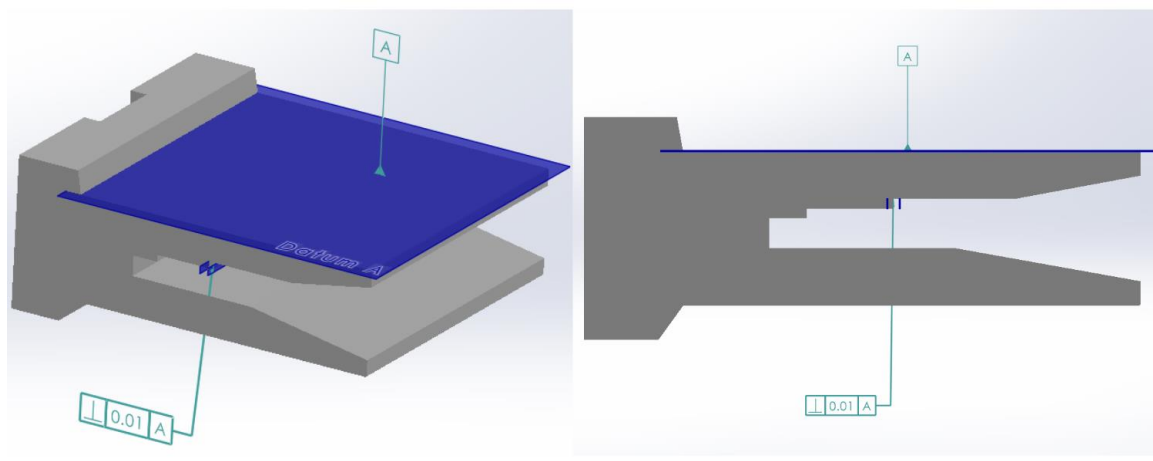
Visualization of perpendicularity geometrical tolerance
